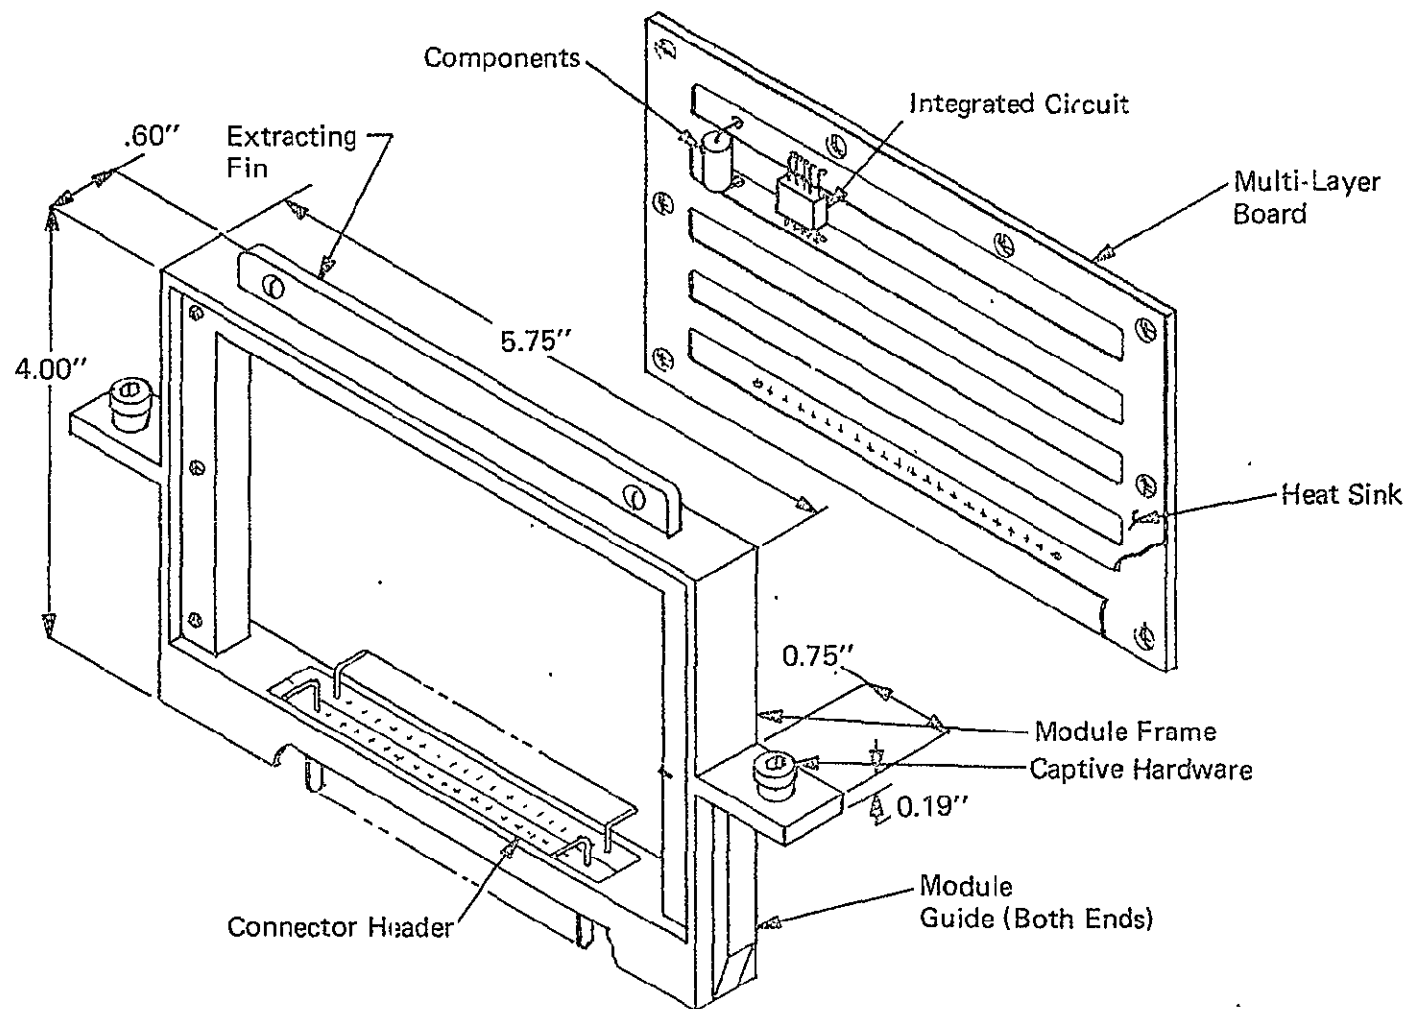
BASIC SINGLE-THICKNESS MODULE WITH DOUBLE MULTI-LAYER BOARD
